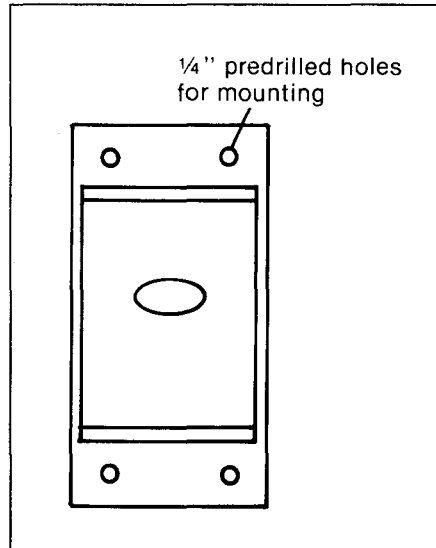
Front view of single compartment wood nest box showing holes for mounting.
